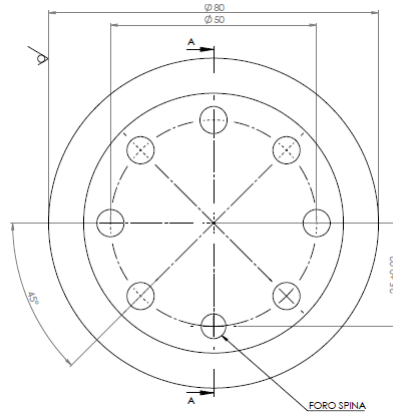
Tool Interconnection Holes Mechanical Drawing
